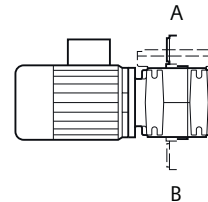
Mounting positions for worm gearbox S, frame size 09 - 29
